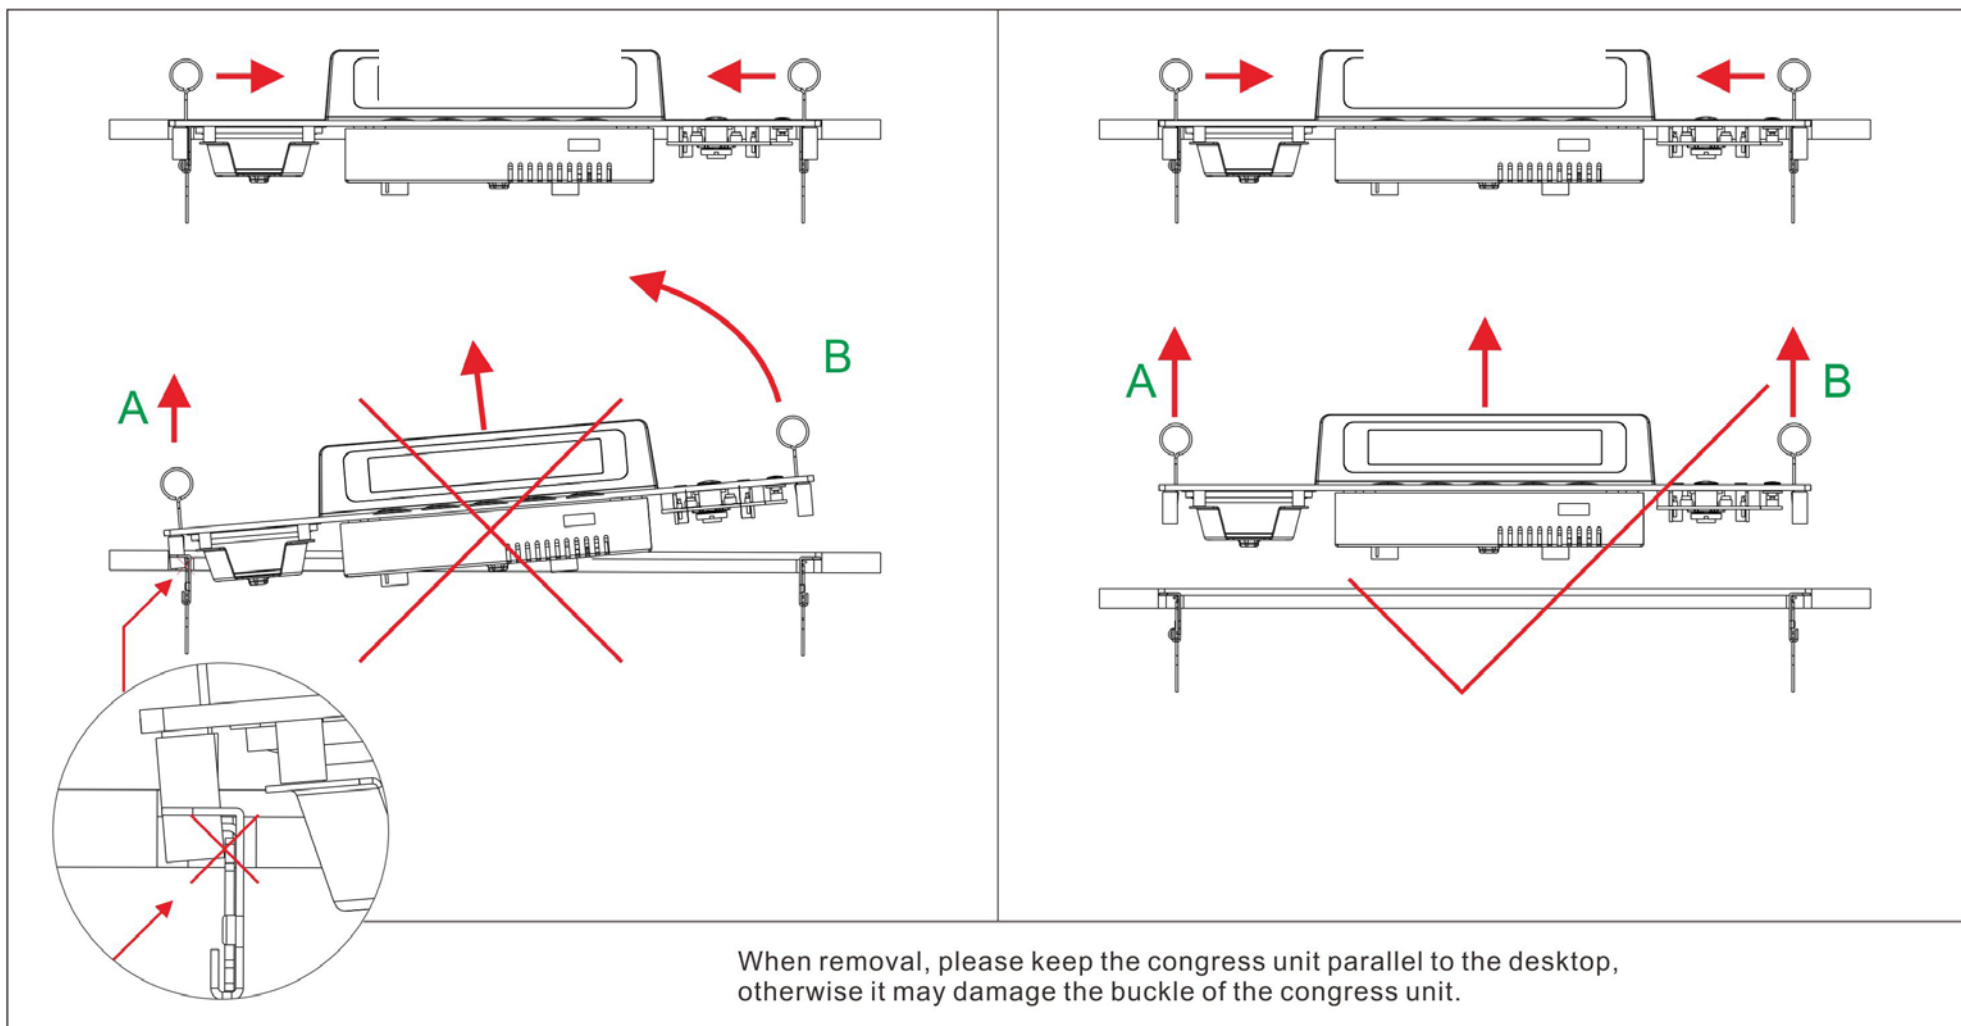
Disassembly caution of HCS-48U9 series flush-mounted congress unit
